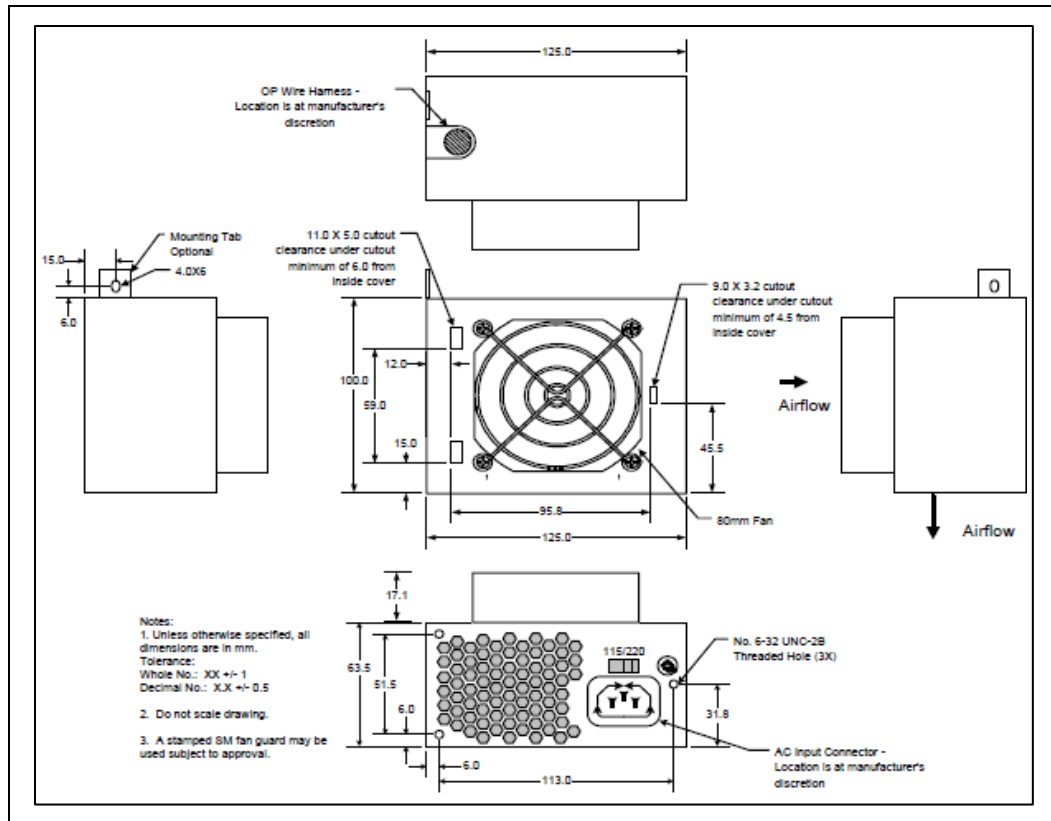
SFX12V Top Mount Fan, Inside enclosure Mechanical Outline (Possible Larger Fan)
